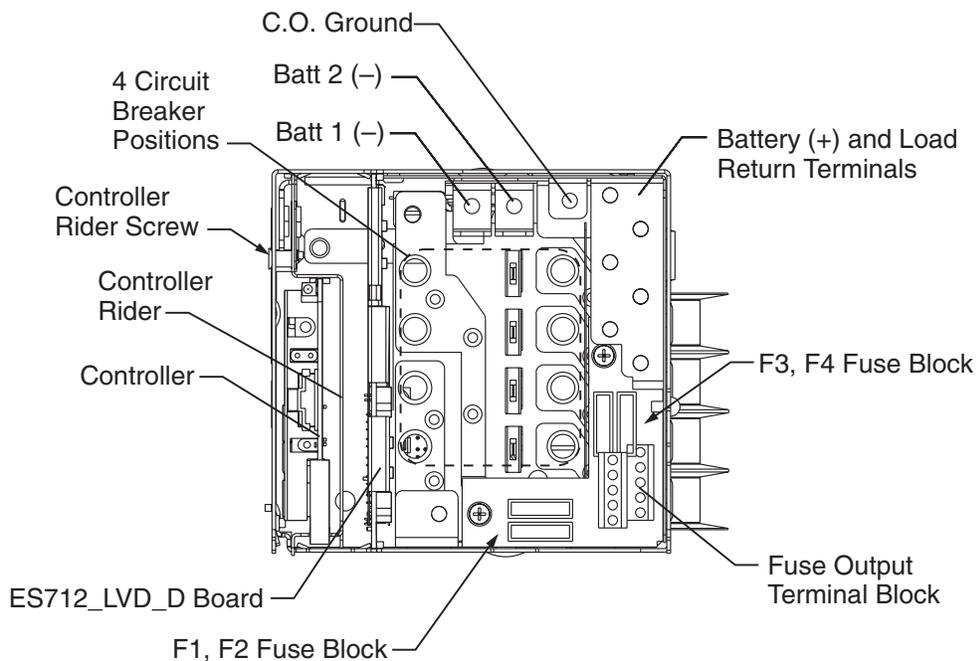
ES714AD Aux Box - Front View with Door Removed
